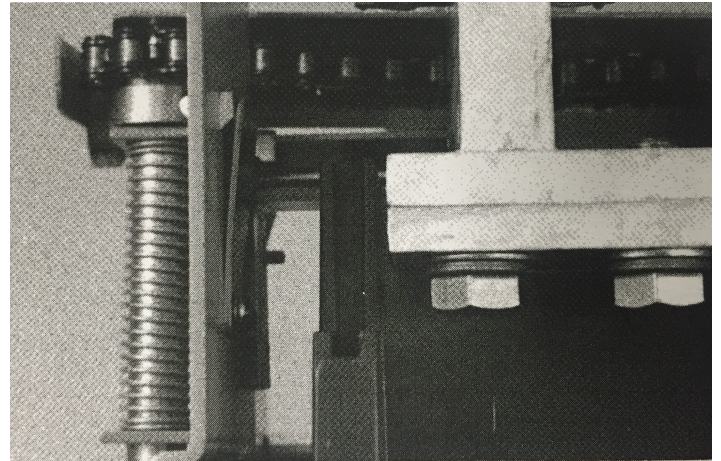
Installation of the detent cam on a draw-out breaker (offset screwdriver required).
